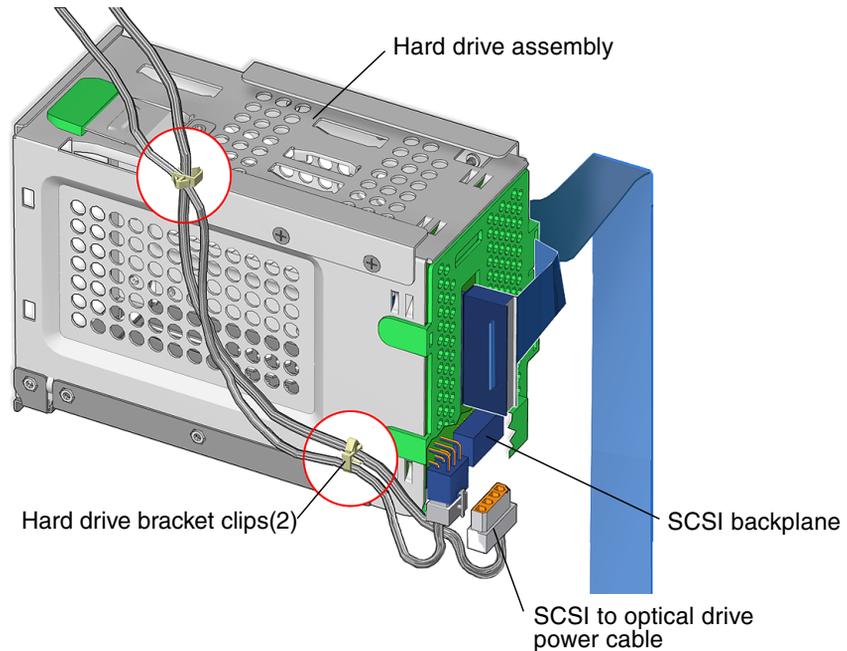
Removing the SCSI to Optical Drive Cable from the Hard Drive Bracket Clips
